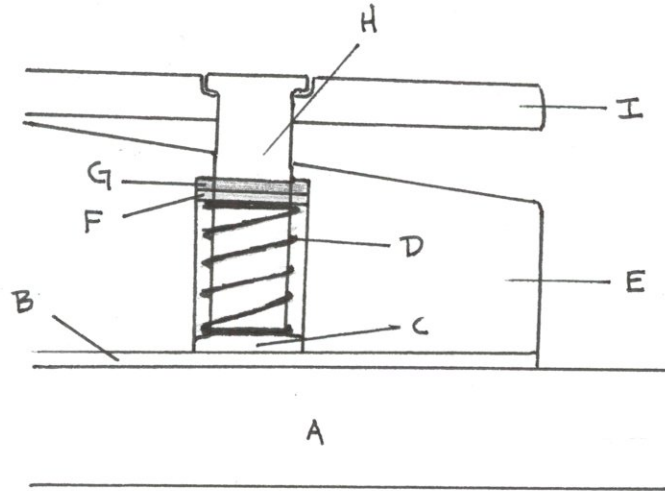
pin assembly with various components as follows: (A) ski, (B) friction plate, (C) lower head of pin, (D) spring, (E) mesoplate, (F) metal washer, (G) softer washer, likely Teflon, (H) remainder of pin, and (I) baseplate
